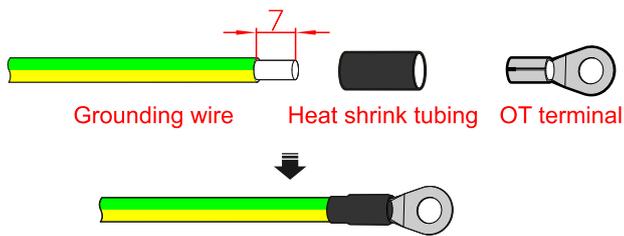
Stripping diagram of external grounding wire (unit: mm)
